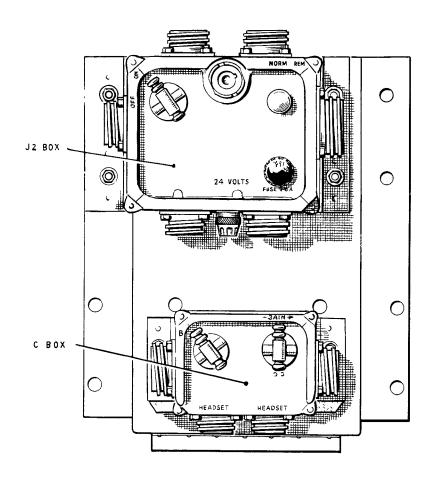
MOUNT ASSEMBLY WITH 12 AND 'C' BOX FITTED
